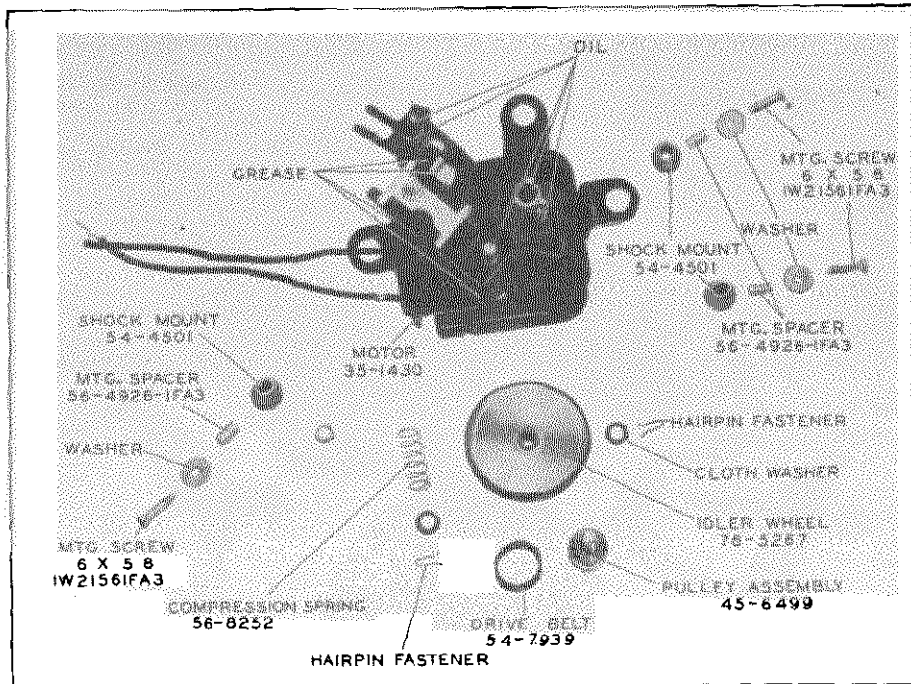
Motor Assembly—Part No. 35-1451 TP9-204
